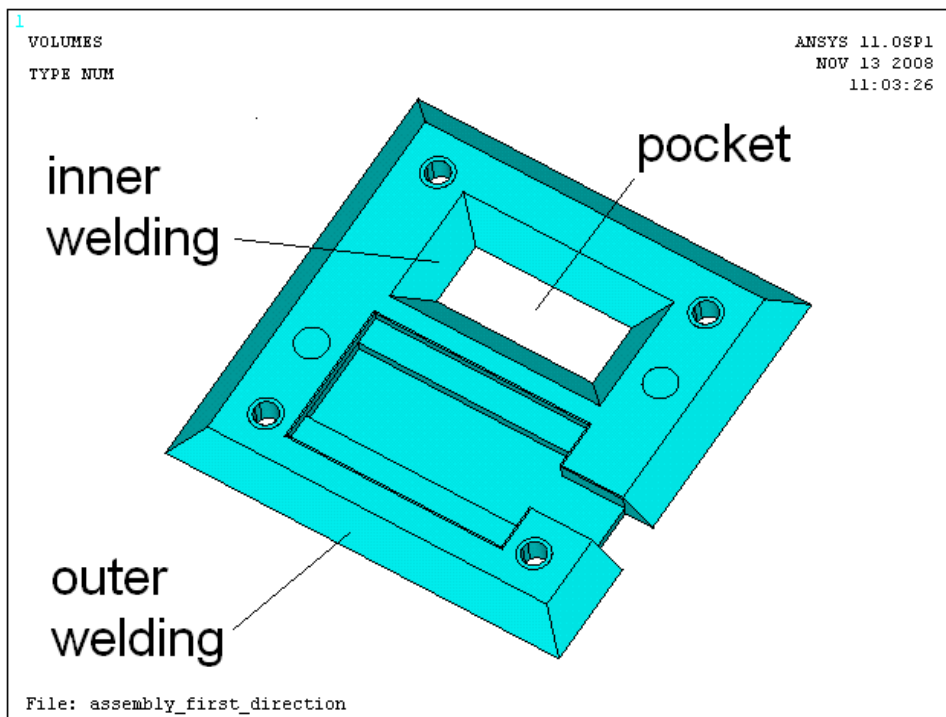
Platform with pocket, outer plus inner welding (configuration b)
